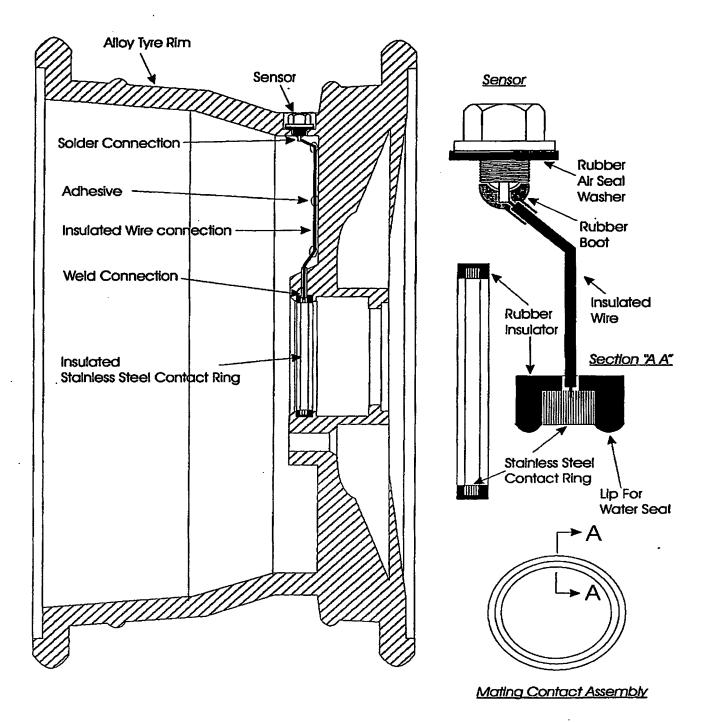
Alloy Wheel Rim Showing Sensor Mounting And Electrical Connection To Hub Mating Contact Assembly
